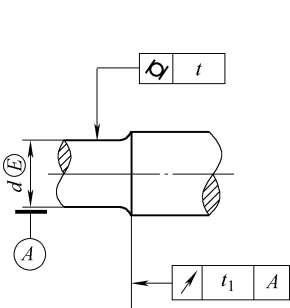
9 Marking method for geometric tolerance of shaft diameter
